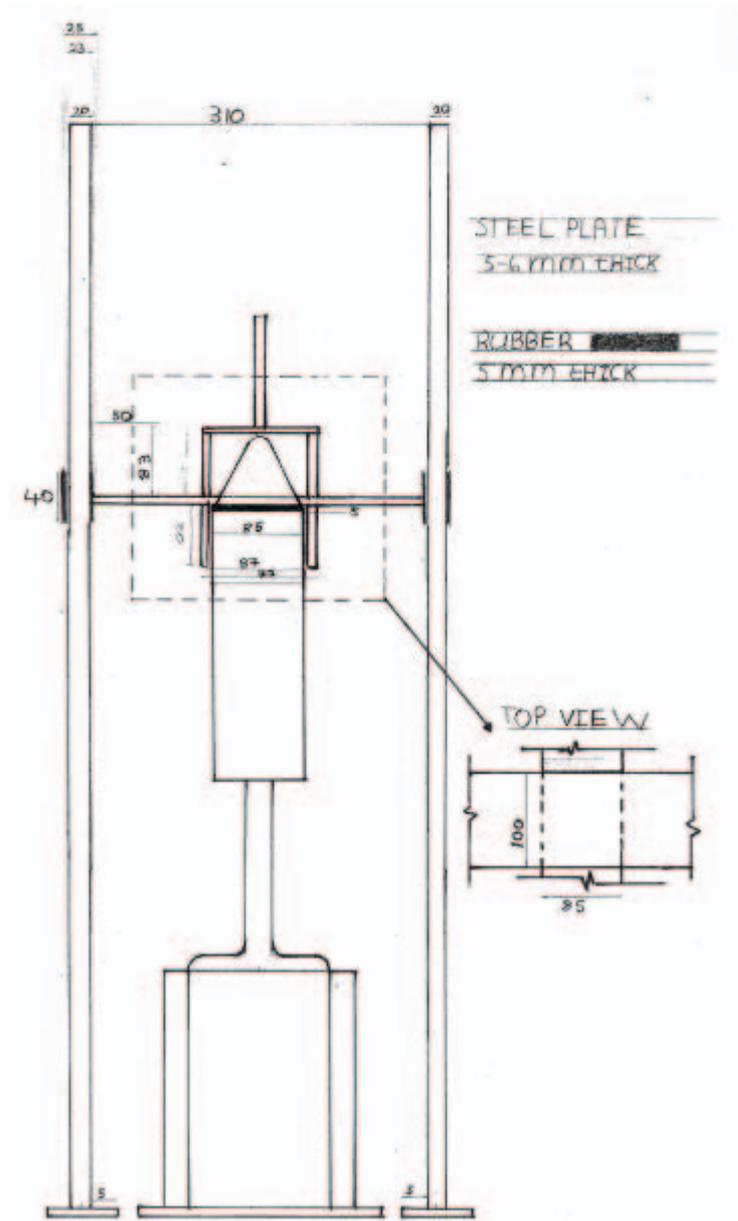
FRONT VIEW OF THE MOUNTING FRAME DESIGN FOR THE KANGO®
